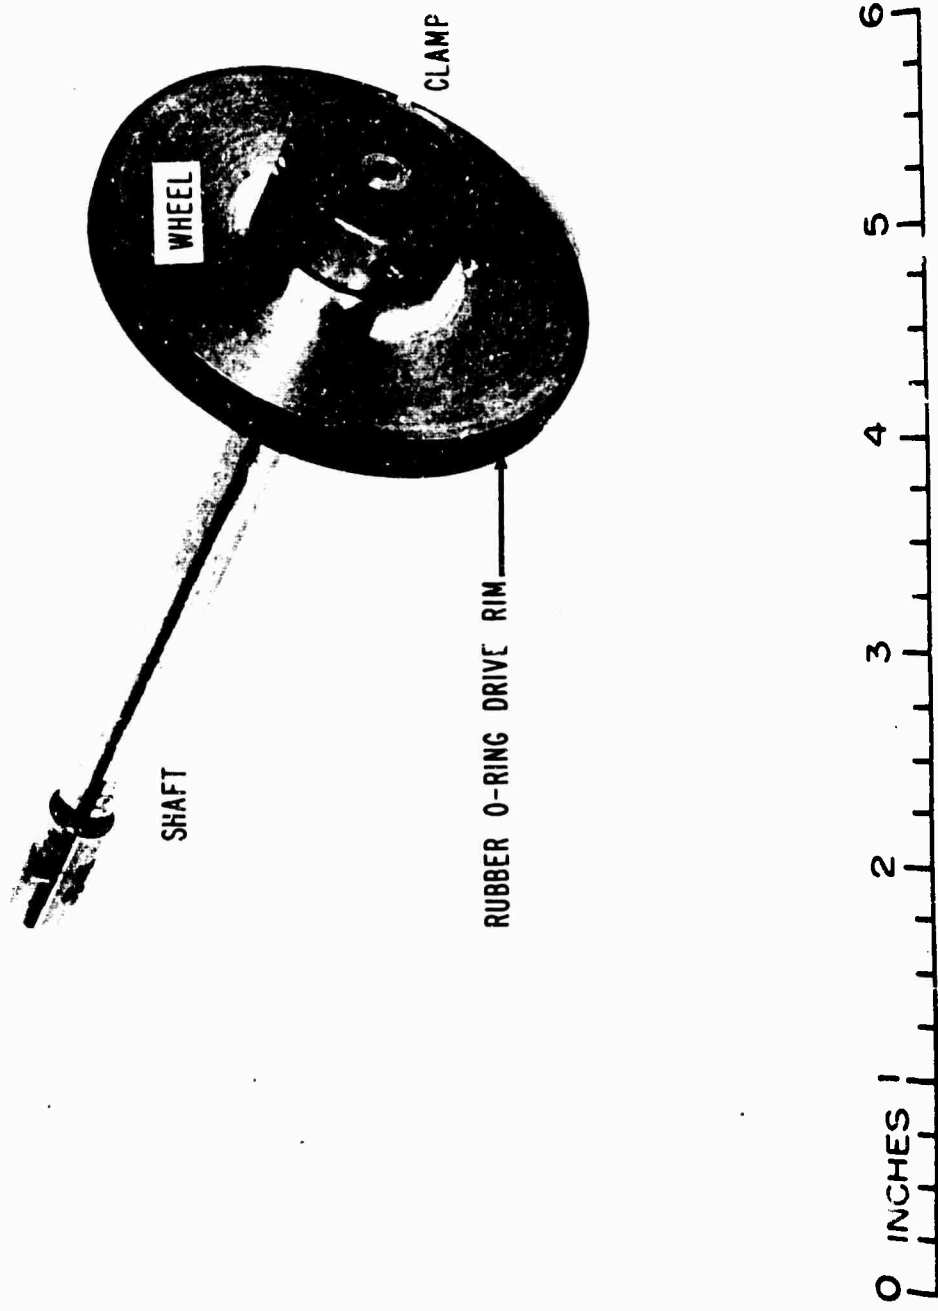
BEAM SPLITTER: DRIVE WHEEL AND SHAFT
